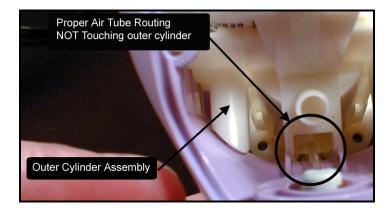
Air Tube Route through Outer Cylinder (not touching)
